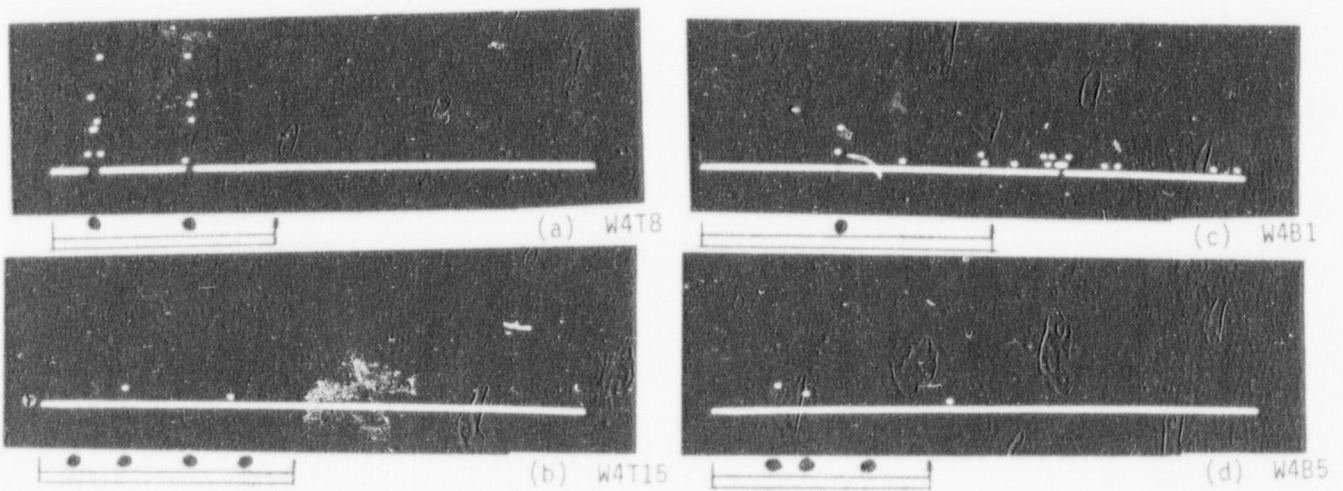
DETECTION OF 1.0" SLAG INCLUSIONS DURING SUBMERGED ARC WELDING OF A533B PRESSURE VESSEL STEEL
